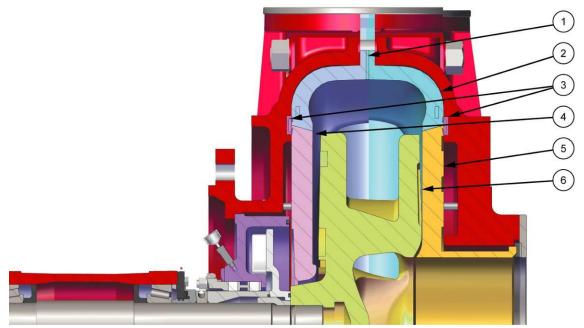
Four Part Separate Rubber. Fitting Frame Plate Liner, Cover Plate Liner, Frame Plate Liner Insert, Throatbush, Volute Liner Seals and Impeller.
